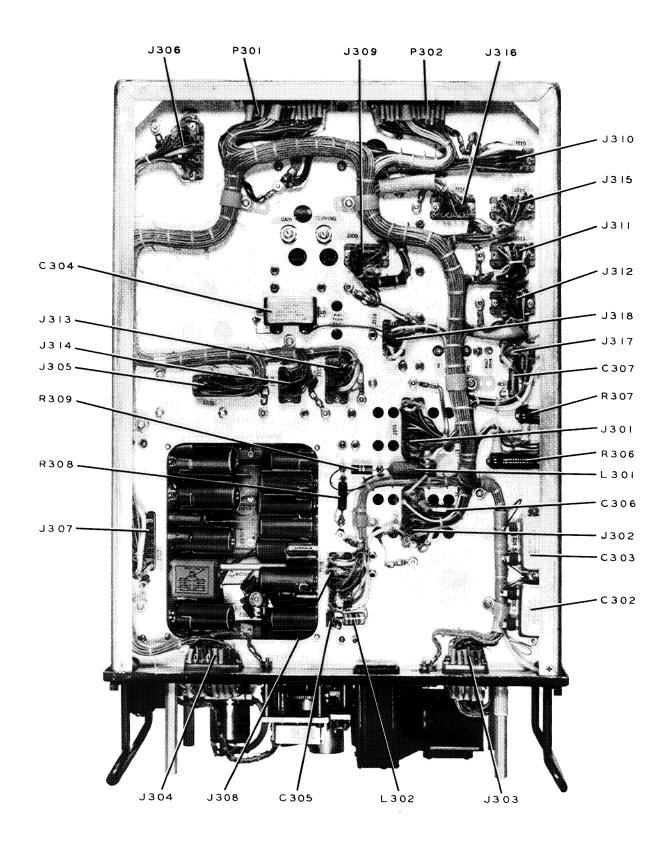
Transceiver 618S-1, Main Chassis and Front Panel, Bottom View
